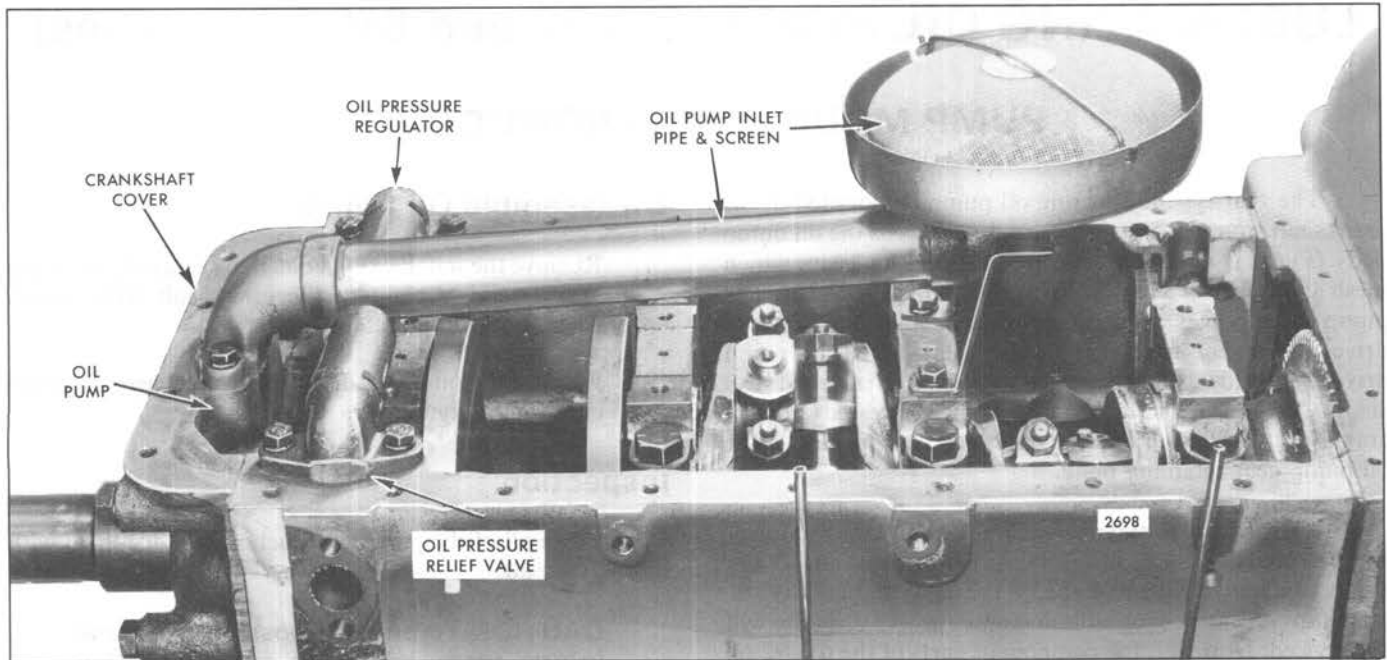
Typical Lubricating Oil Pump Mounting (6V-92 or 8V-92 Engine)
